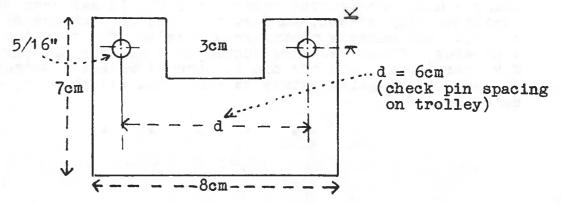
Details of extension arm, made from rigid sheet material such as dural.
